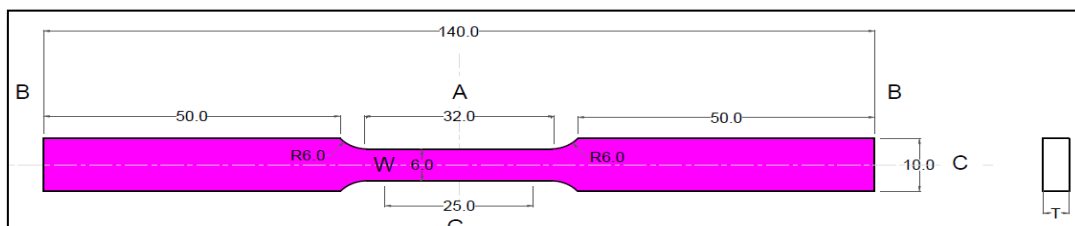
Dimensions of the tensile test specimen according to ASTM E8/E8M-16a; all dimensions in mm.
